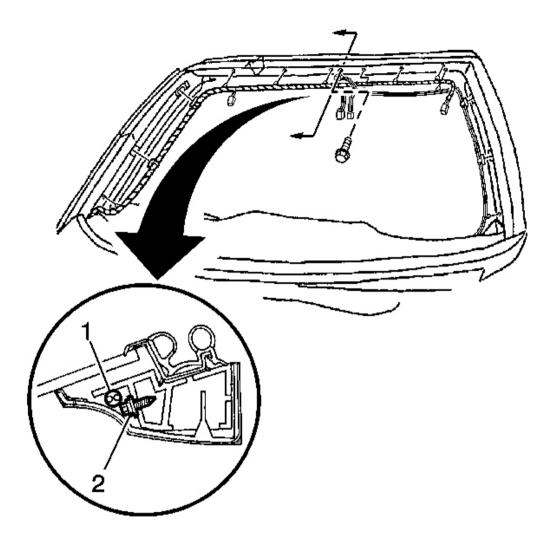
Check That The IP Harness & Ground Wire Bolt Courtesy of GENERAL MOTORS CORP.
